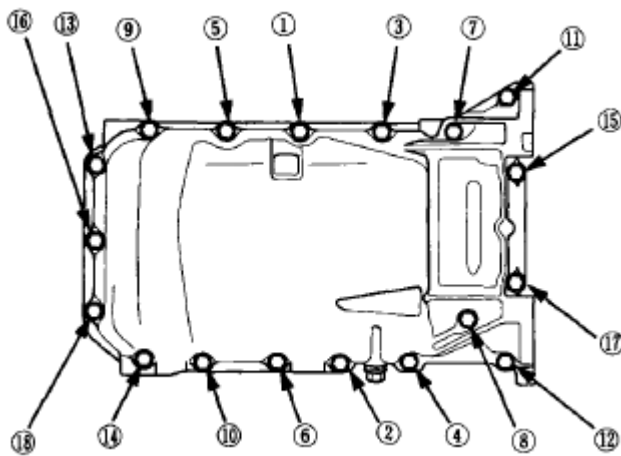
Identifying Oil Pan Bolts Tighten Sequence
